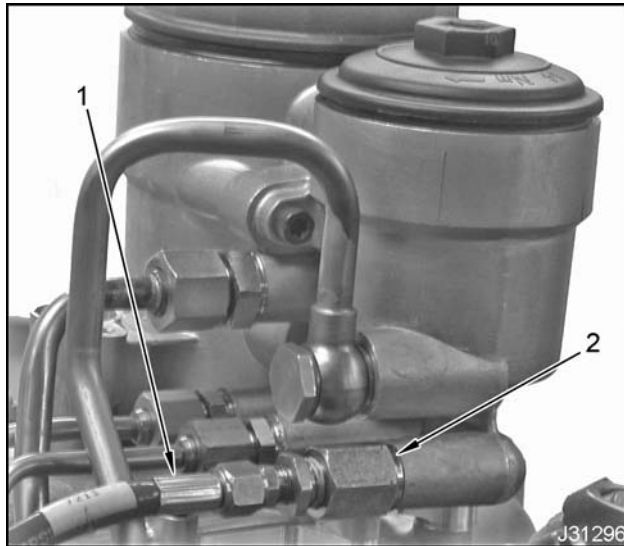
ICP System Test Adapter installed with Fuel Pressure Gauge
